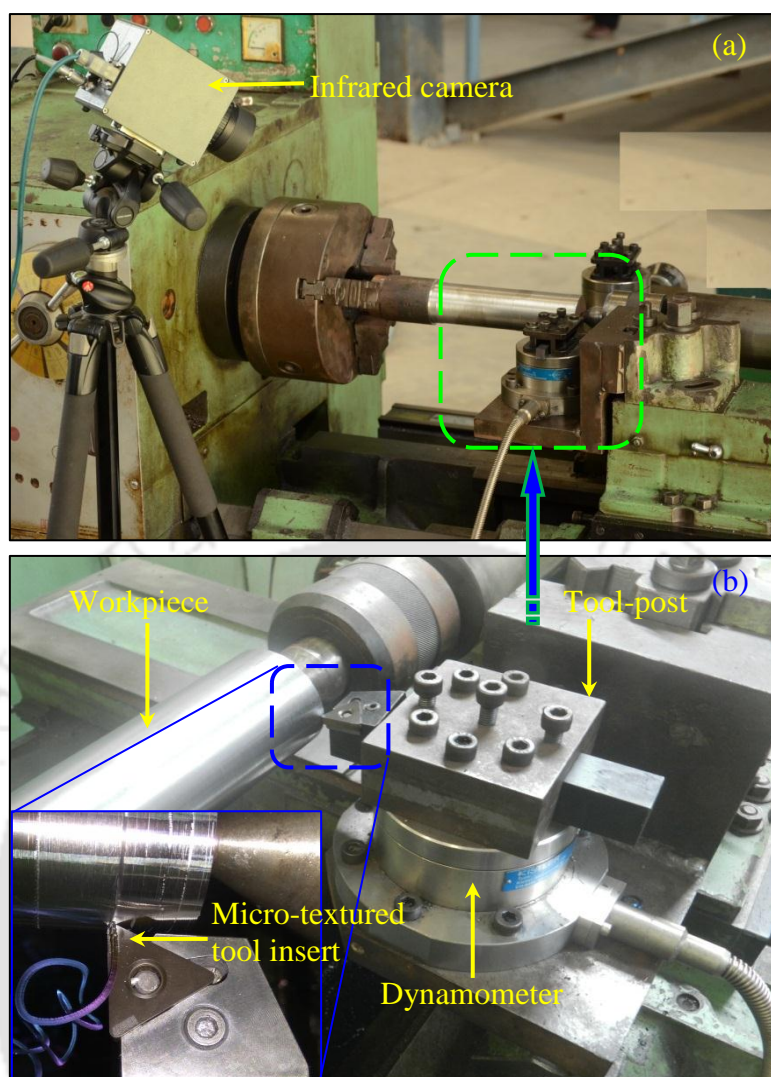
(a) Overview of experimental machining setup and (b) magnified view of dynamometer, tool-post and workpiece
